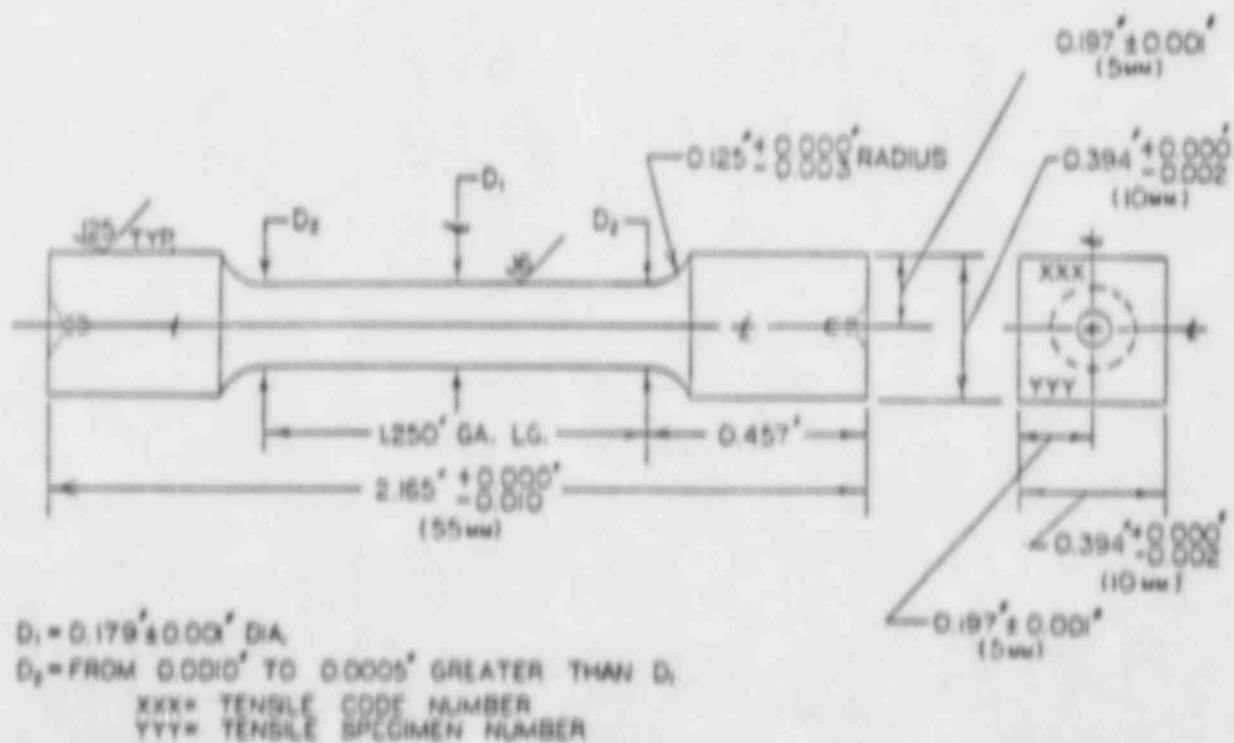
Tension test specimen design. (Dimensions in inches, 1 in. = 2.54 cm.)
